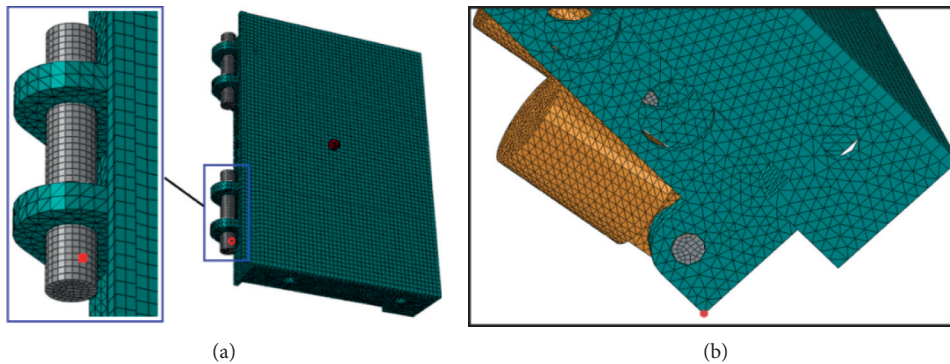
Test point positions of (a) pin shaft and (b) tail beam.
